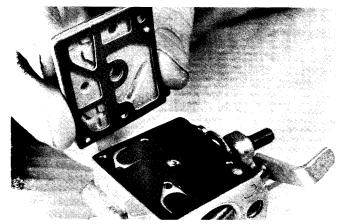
Removing/Installing Fuel Pump Cover and Gasket
